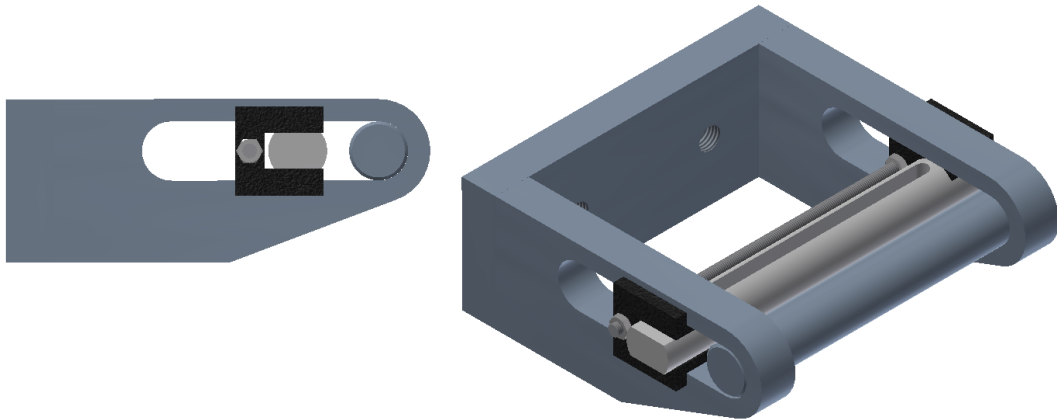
CAD representation of material wrap grip used showing both the fixed and sliding rollers as well as the block that lock the sliding roller in place
